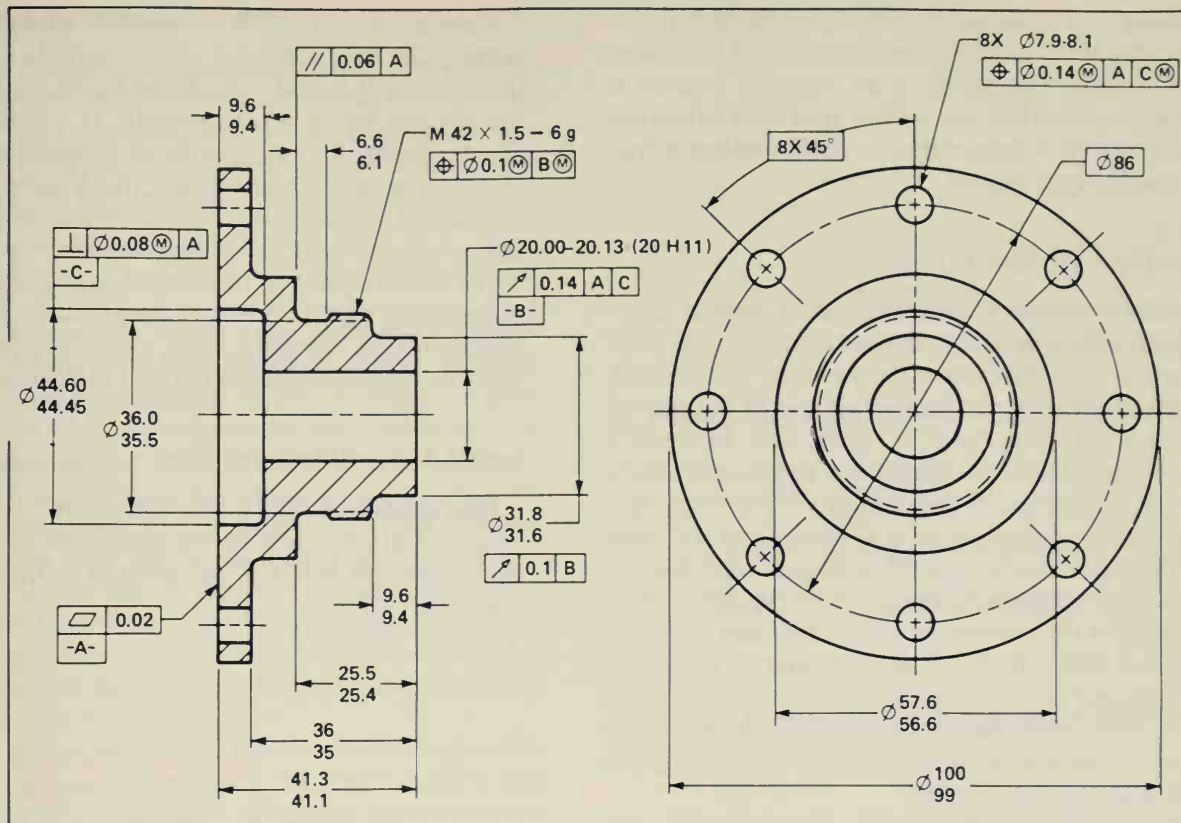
Geometrically dimensioned and toleranced drawing (From ANSI Y14.5M-1982)
